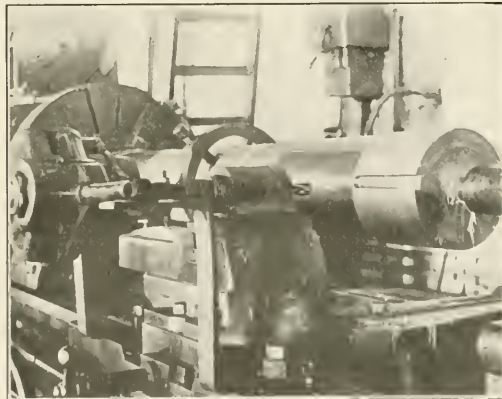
Air-Operated Milling Attachment for Engine Lathe
